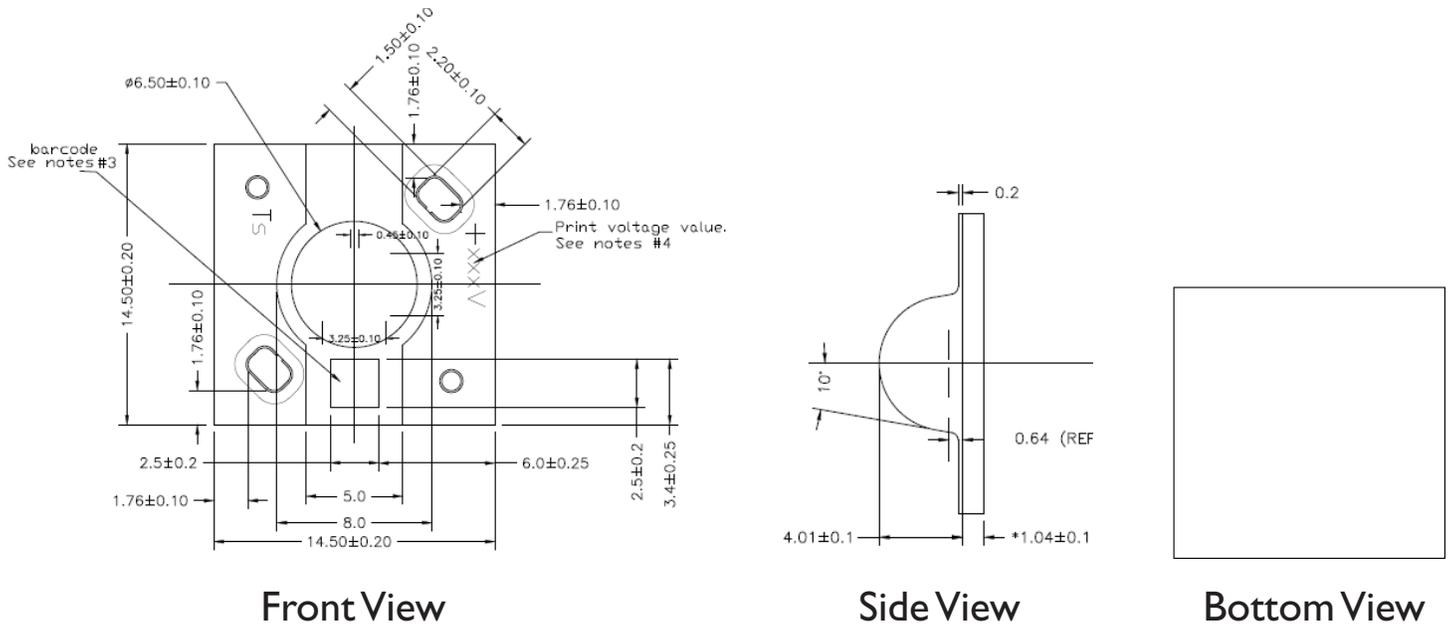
Package outline drawing for LXV8-PWxx-00x4.
